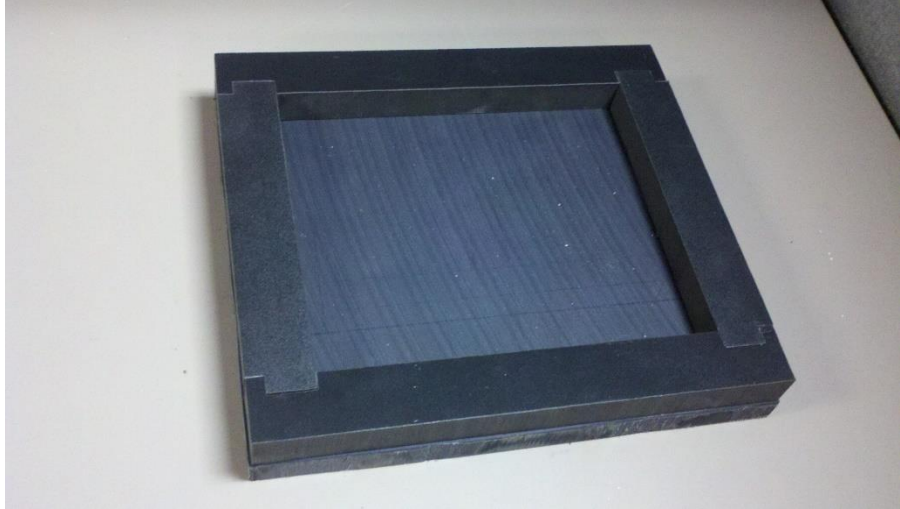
Photo. The assembled protective walls lying on MDS-filled-cast-nylon base board.
